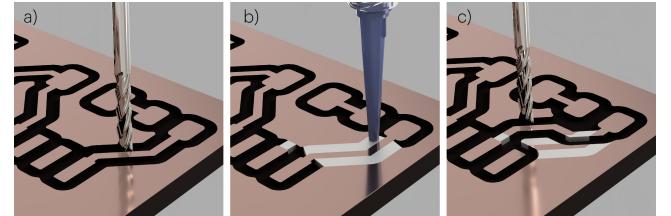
PCB RENEWAL principle illustration: a) initial PCB engraved, b) selectively depositing conductive filler into isolation grooves, c) re-engraving new circuit trace.
